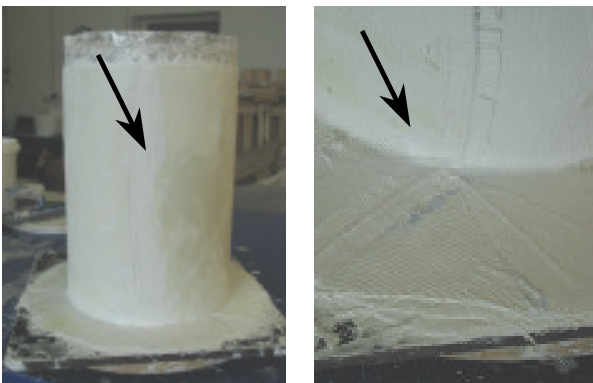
Defect type 1 (left) and type 2 (right) on a tube with flange
